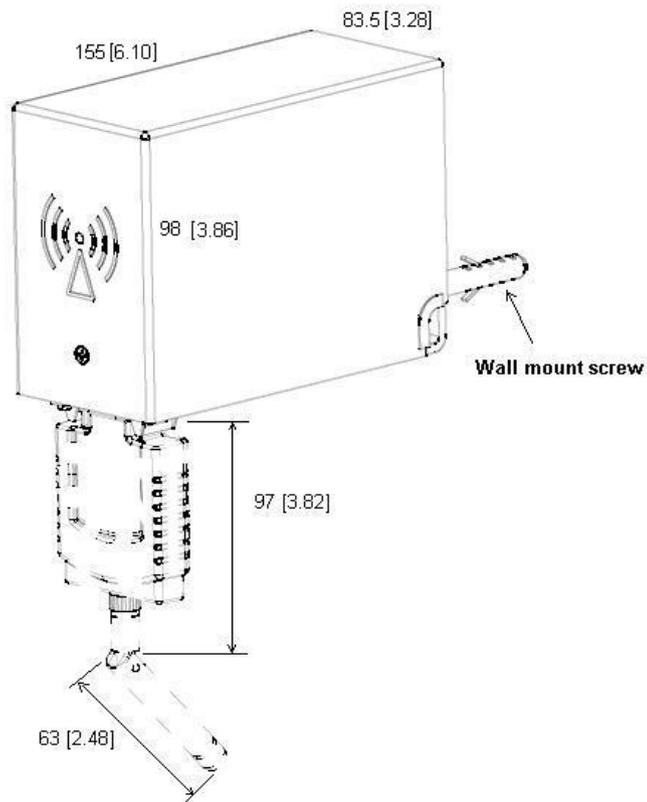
Dongle Assembly Dimensions(wallmount)
